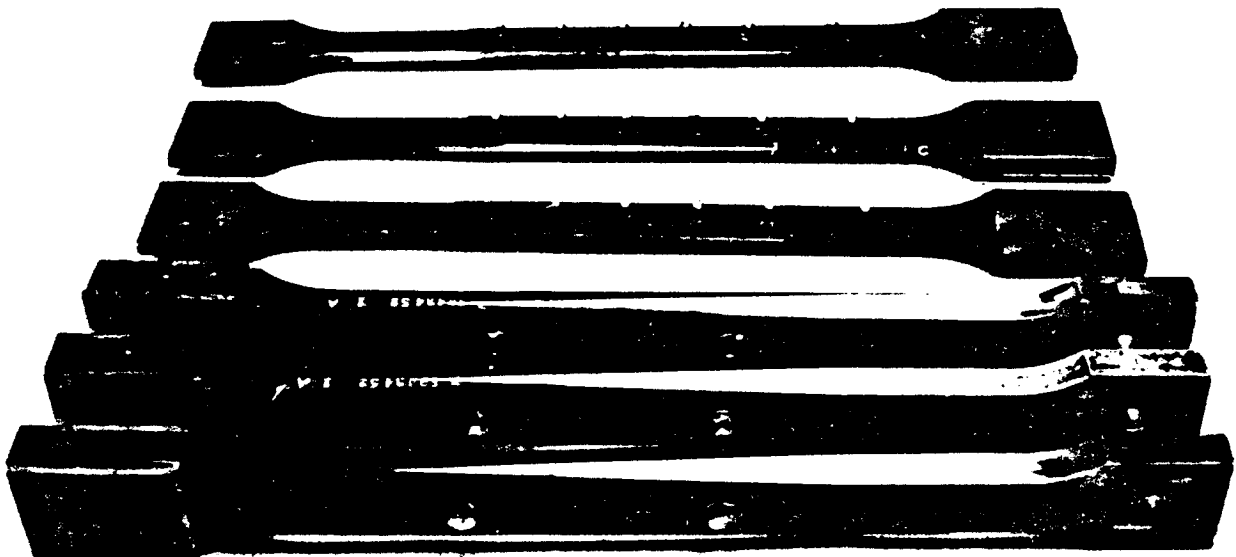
Z5943452-1 AND -501 SPECIMEN
